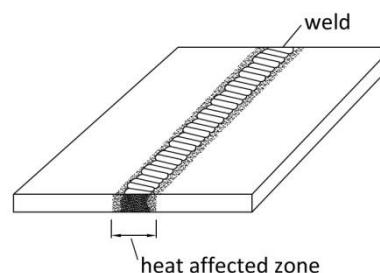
Heat-Affected Zone in a Straight Chromium Ferritic Stainless Steel. The Sensitized Zone Extends Across The Weld Deposit [10]
